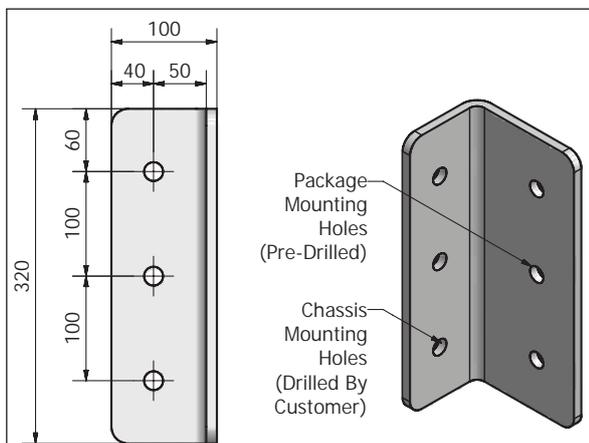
Recommended Vehicle Chassis Mounting Bracket Hole Positions.
